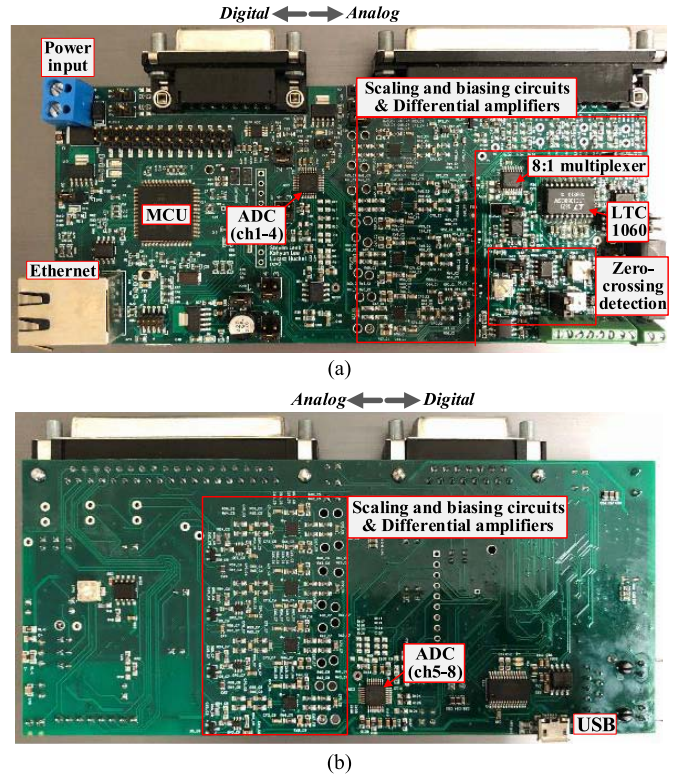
(a) Top and (b) bottom sides of the prototype acquisition board.
